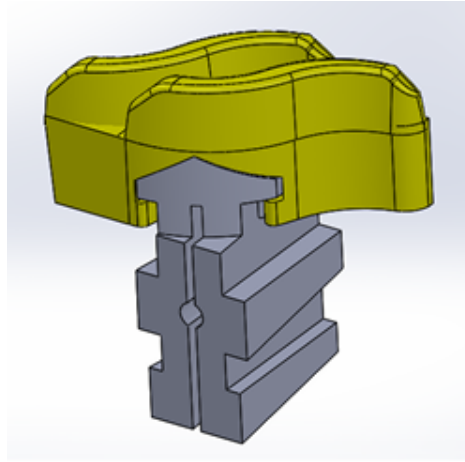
S-Groove Imprinting Device. Source: [9]
